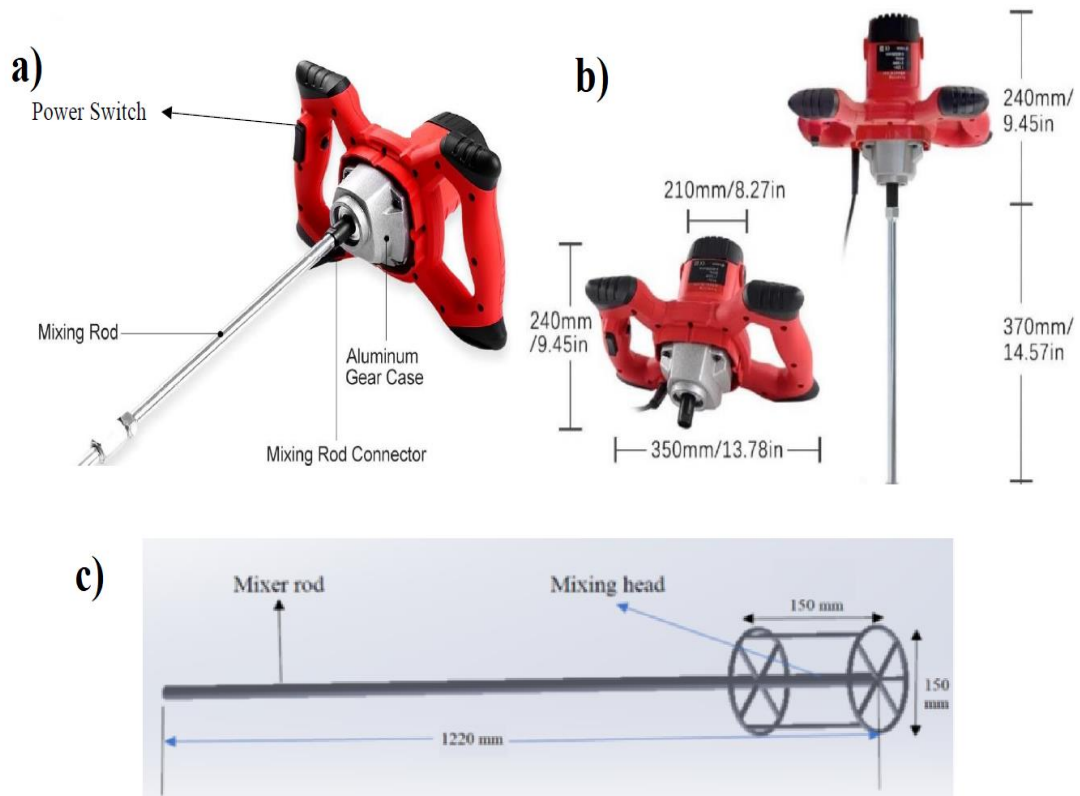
Design and Development of Stirring Mechanism; (a) Component details of Stirrer, (b) Dimensions of Stirrer machine, (c) Dimension of mixer rod & head
